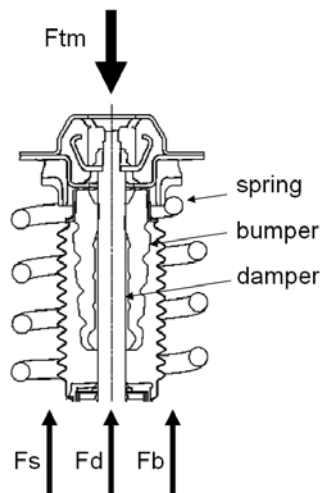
Top mount force components spring F_s , damper F_d and bumper F_b
